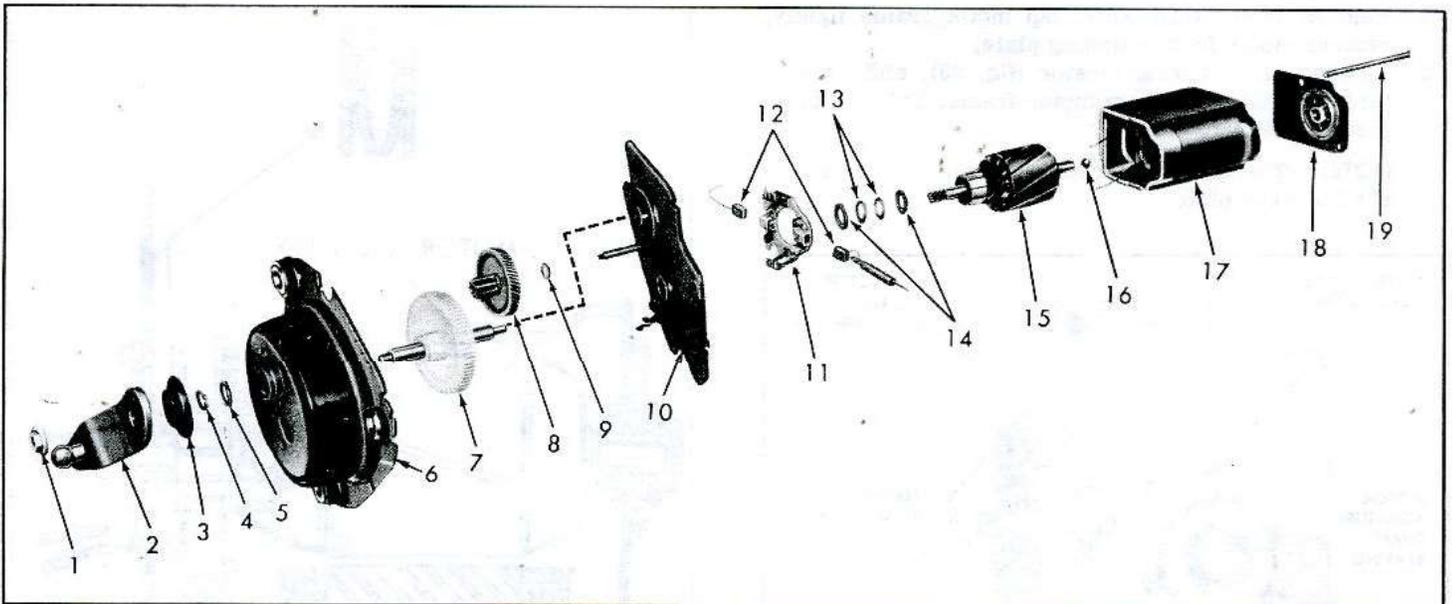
Wiper Motor and Gear Box Exploded View (Typical)
